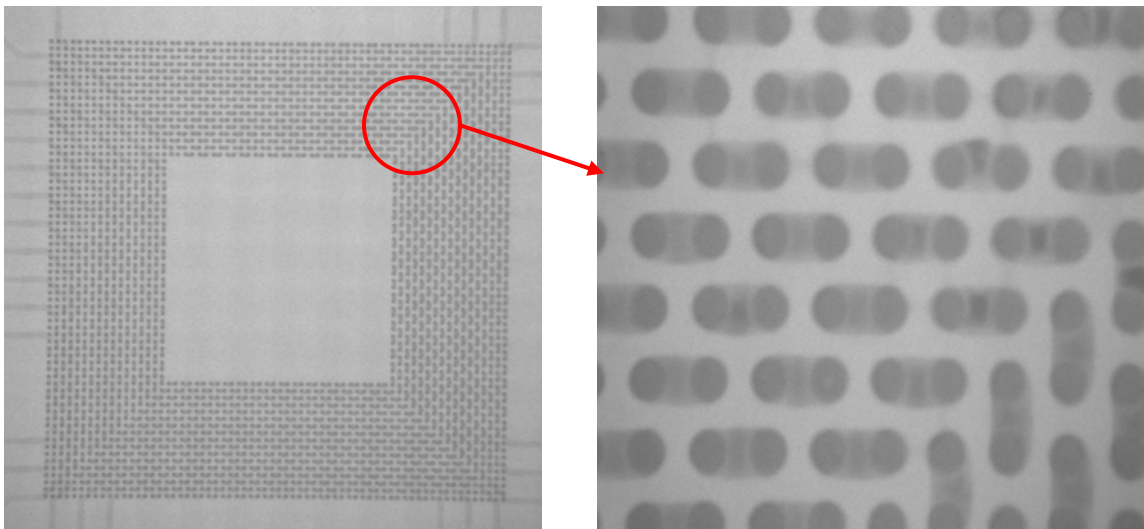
Cross-sectional view of assembled 10 mm × 10 mm test chip
